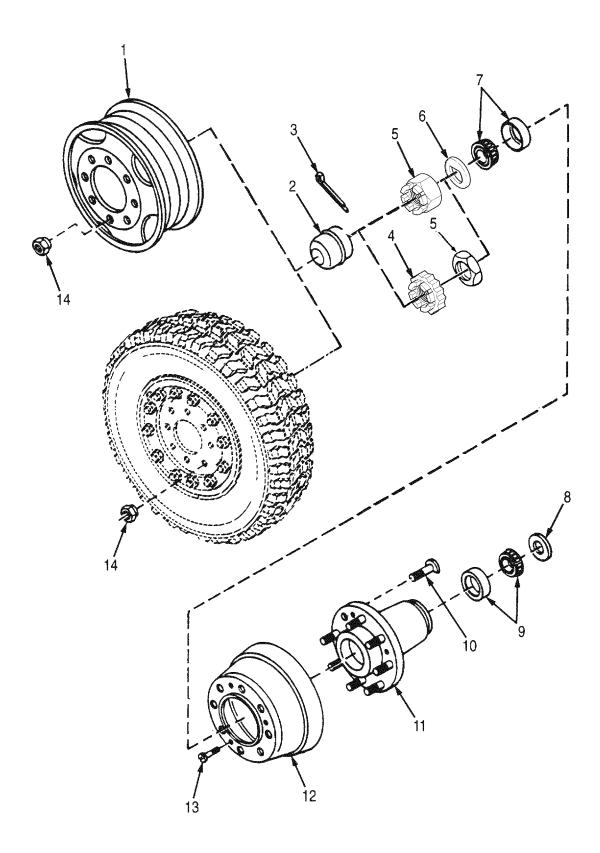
Wheel and Hub Assembly (Sheet 1 of 2)
